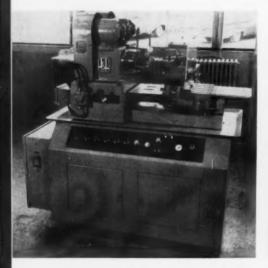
View of a Jones & Lamson twinspindle precision boring machine tooled up to economically produce grease retaining rings.
